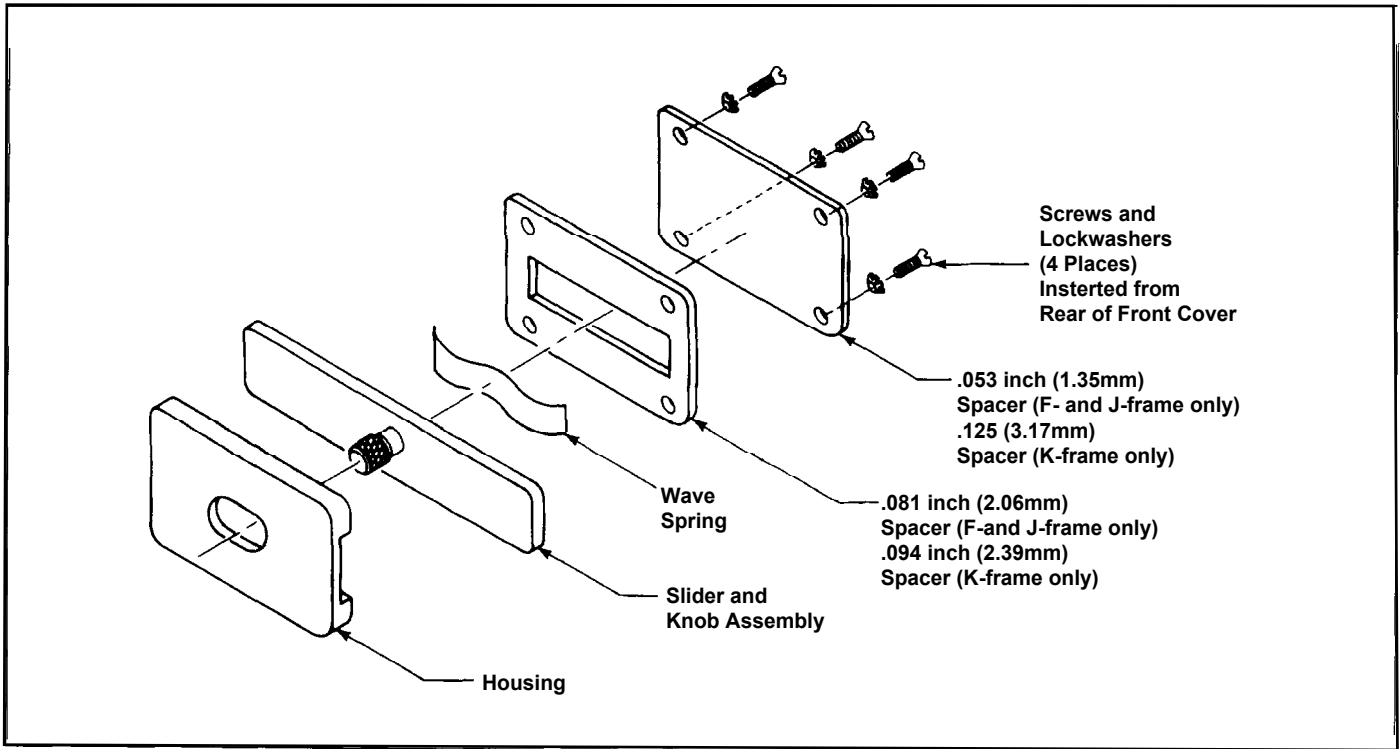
Assembly Sequence of Sliding Bar Interlock Components.
